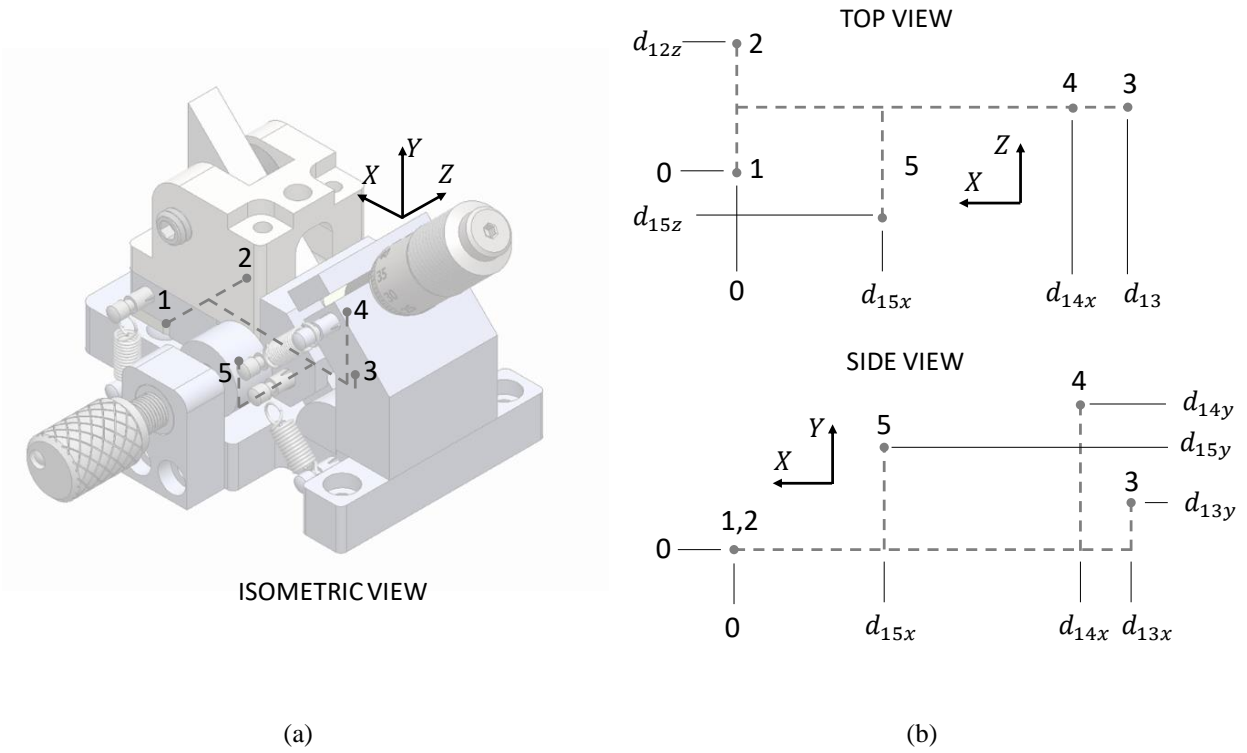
Geometry of contact layout for kinematic goniometer (a) isometric (b) top view and side view
